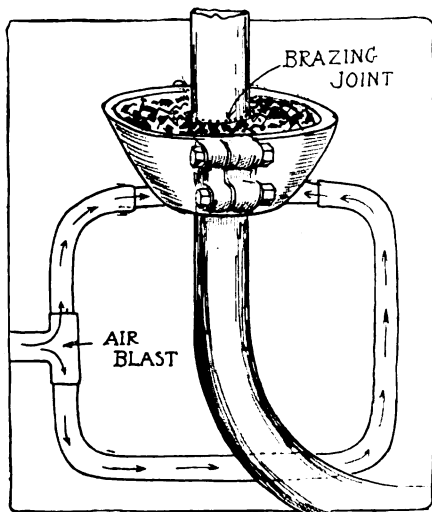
For brazing a large pipe a portable forge made in sections, is clamped to it
